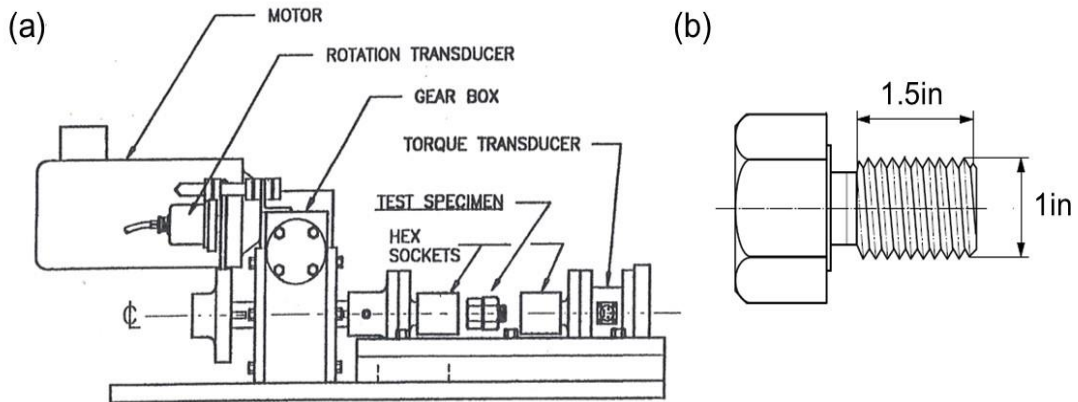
(a) Diagram of the major components of the standard API 7A1 machine used for evaluating thread compounds; and (b) Drawing of a standard 1 inch bolt used for the tests.
